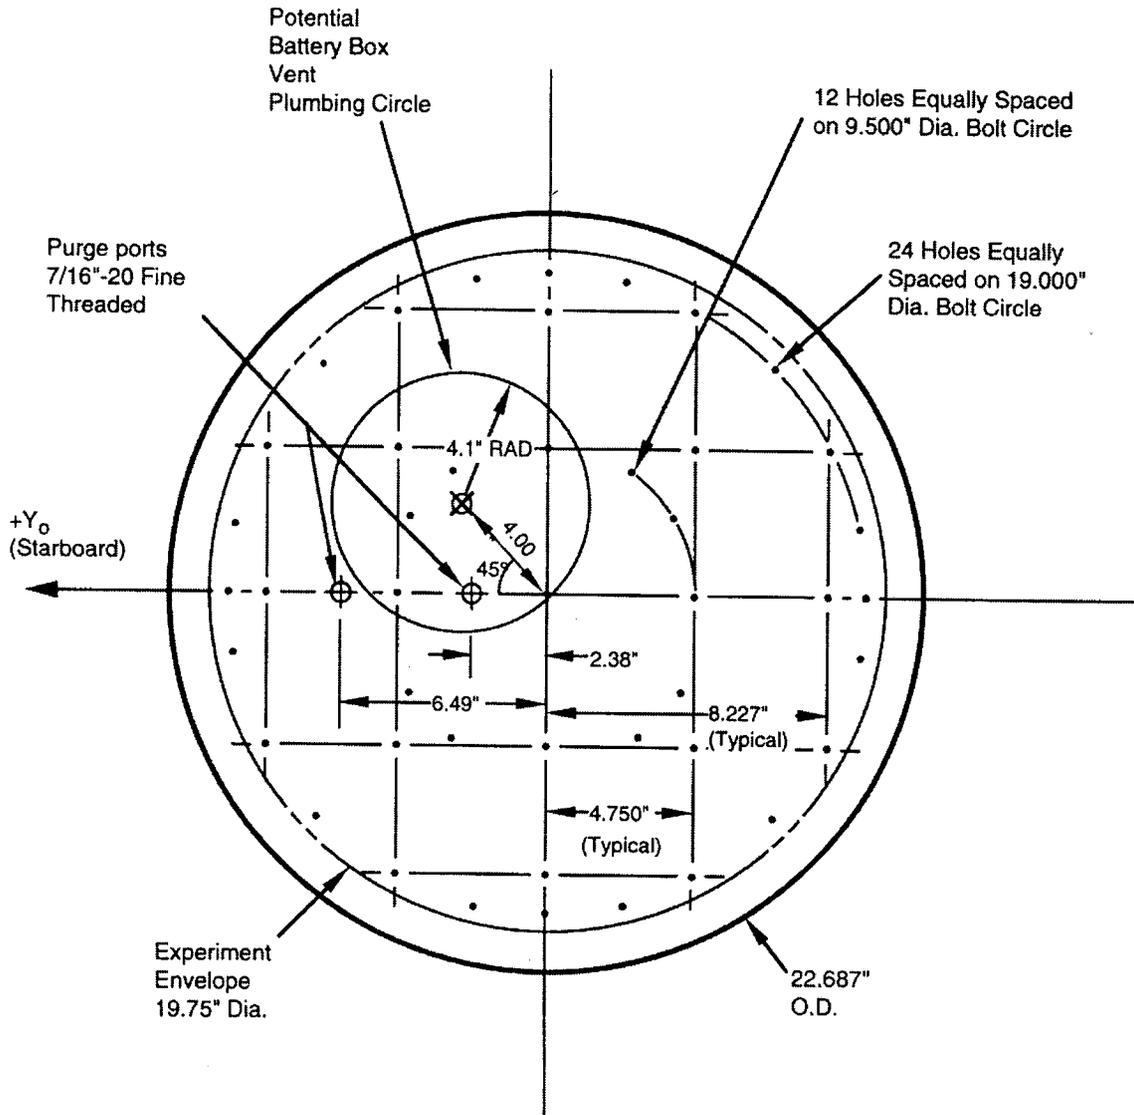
HITCHHIKER SEALED CANISTER (UPPER END PLATE)
